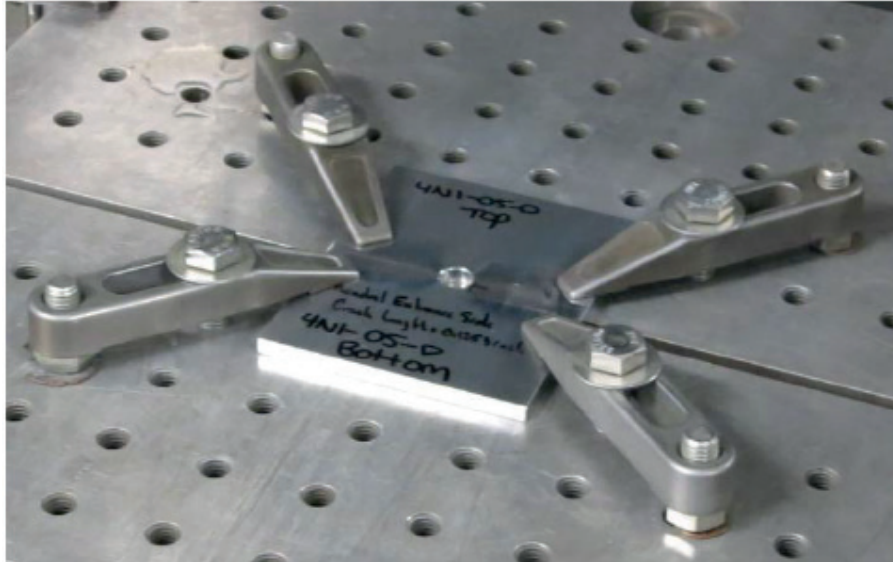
Photograph of Cx Coupon Clamped in Wire EDM Cutting Machine. Photo Courtesy of Hill Engineering, LLC.
